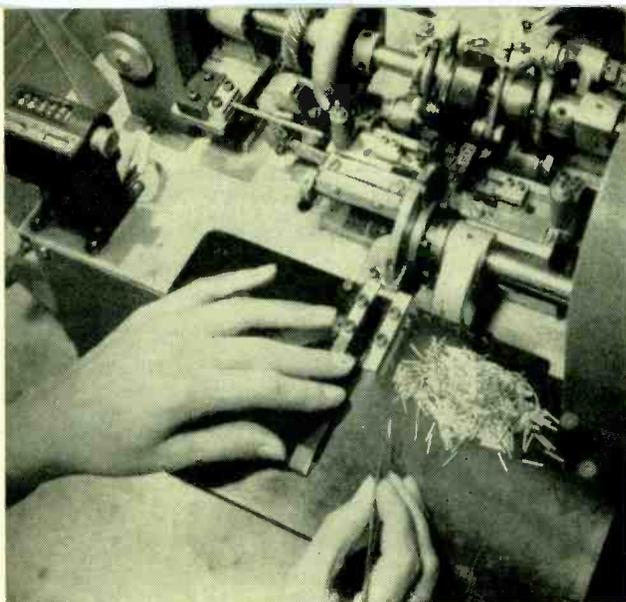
Miniature welding machine used in making miniature tubes. Wire tabs 0.006 × 0.002 in. are welded to 0.25-in. diameter cathodes
